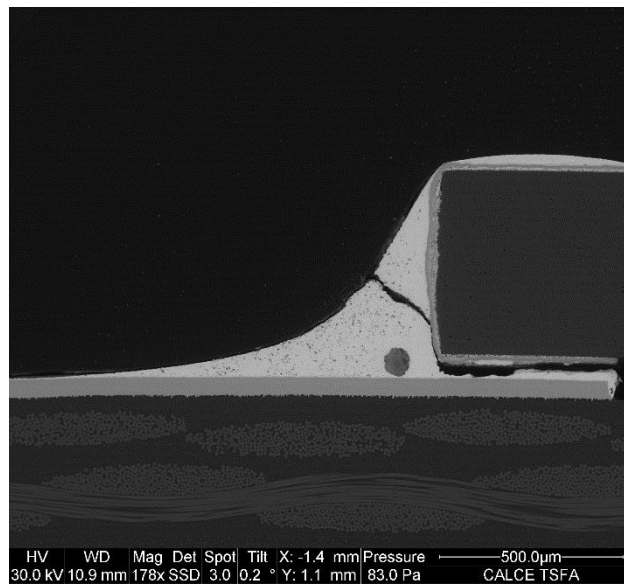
Solder Crack in R3 (Aged 500 Hours, Early Failure)
